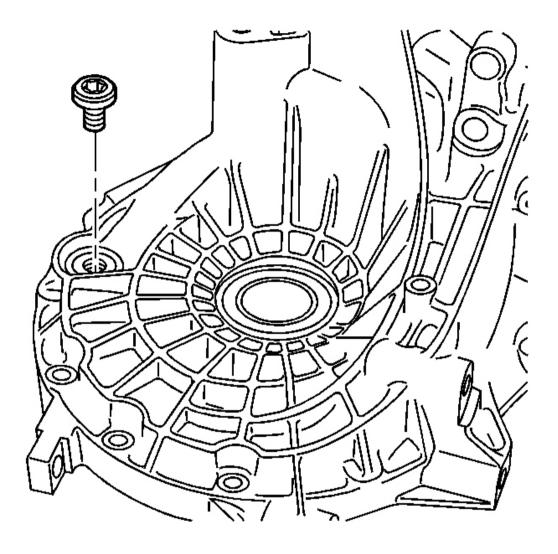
View Of Transmission Drain Plug Courtesy of GENERAL MOTORS CORP.
